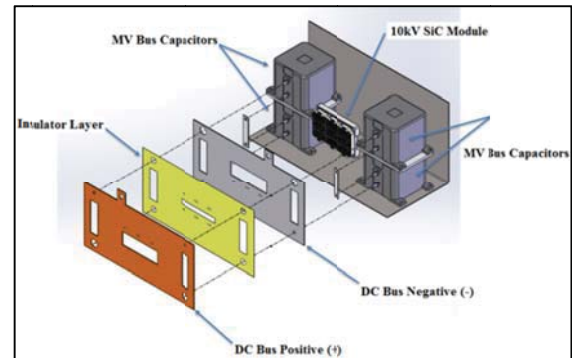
10 kV SiC Medium Voltage inverter assembly.
